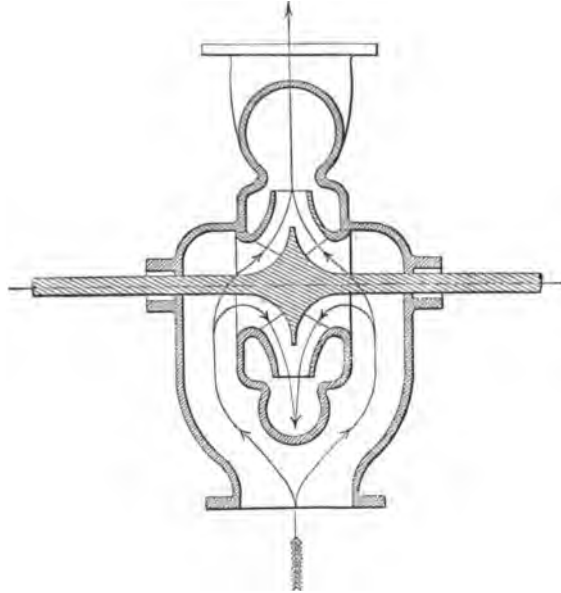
De Laval Turbine-driven Pump. Axial Section.
